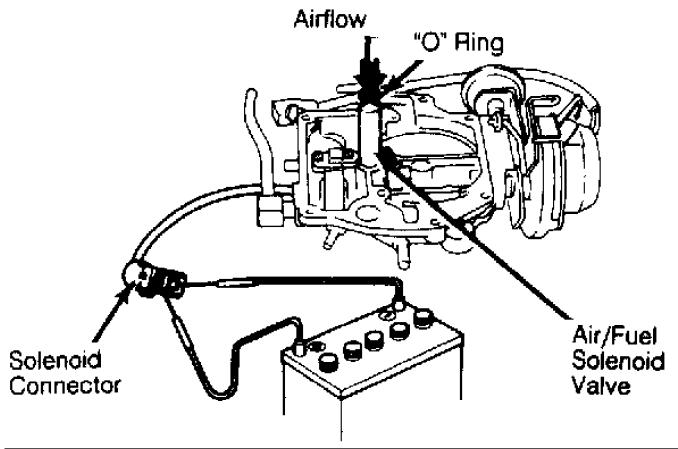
Checking Air/Fuel (A/F) Solenoid Valve Courtesy of Mazda Motors Corp.
